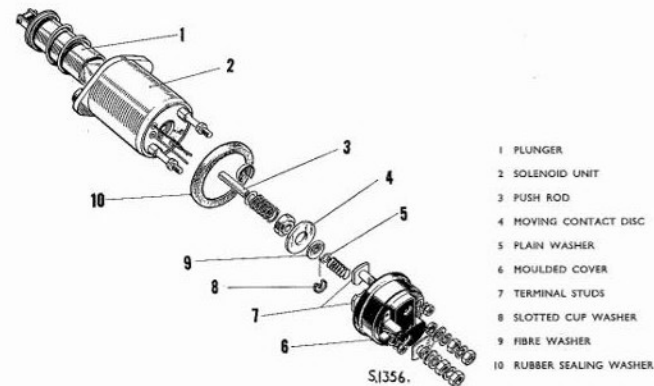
Details of the solenoid unit fitted to the M45G starter motor
